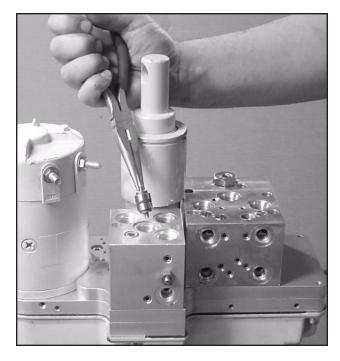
Install P.O. Pilot Spool Assembly with new inner and outer o-rings to the Universal Valve Block Assembly.
